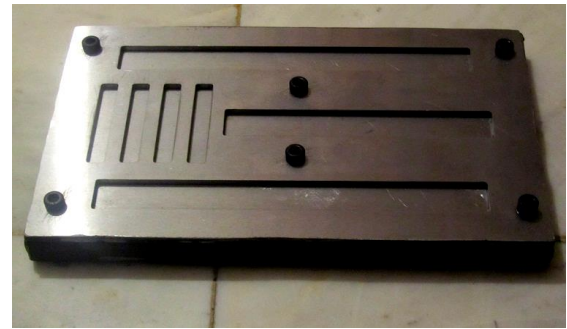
Fabricated mold for samples of tensile, flexural and impact
